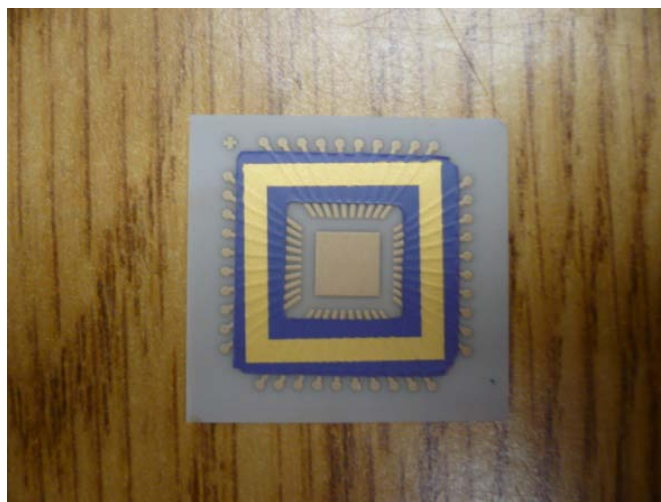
AlN Base Package with Au Seal Ring on LTCC Tape
